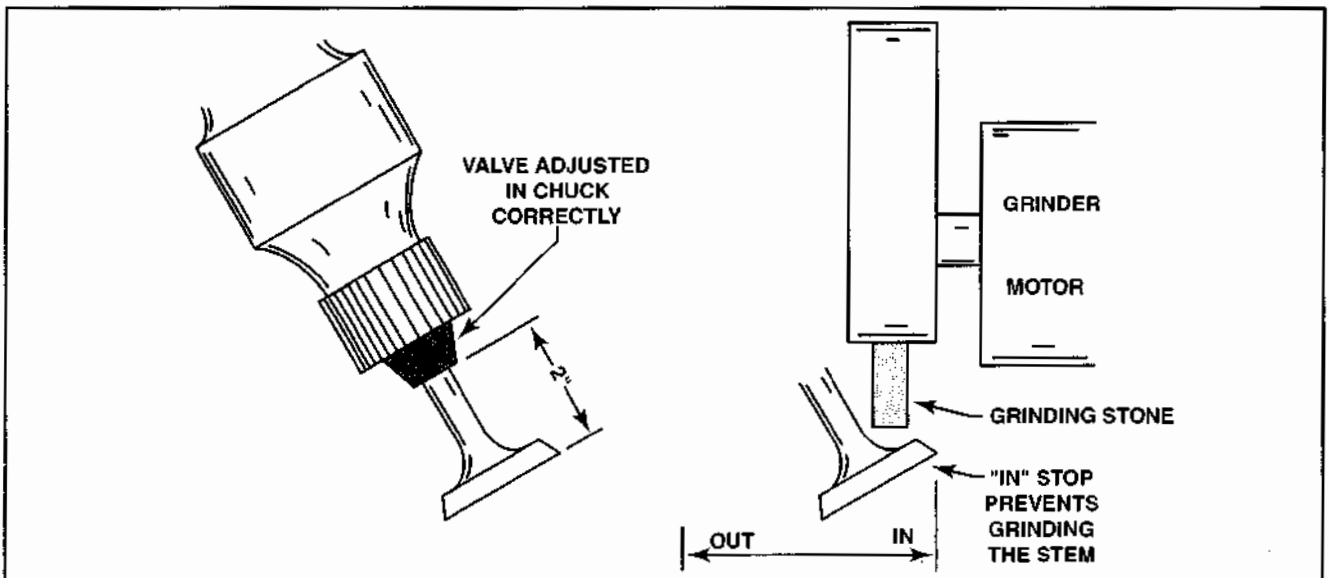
When a valve is secured in the chuck of a valve grinding machine, adjust the "in" and "out" stops so the valve face passes the stone completely on both sides. Be sure that the stem does not contact the grinding stone.
